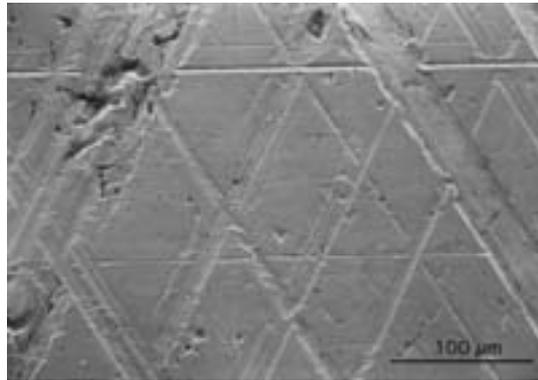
A plateau honed cylinder bore surface in a combustion engine.
